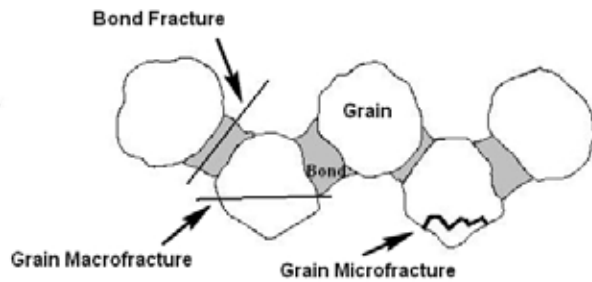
Grain and bond fracture of a grinding wheel
